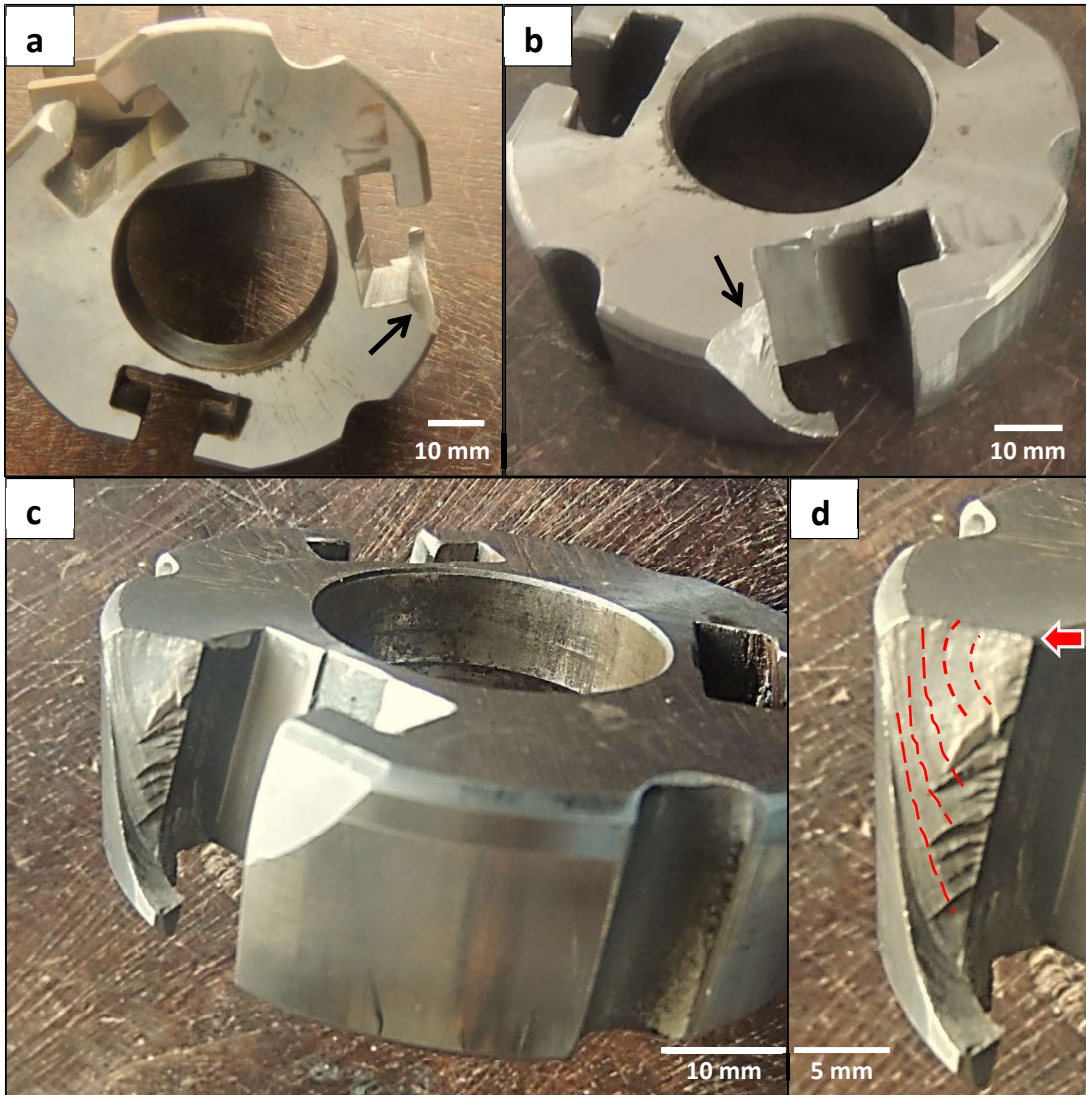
Different views of the failed plunger showing the fracture-location and surface features; (a, b) oblique views showing that the plunger fractured at one corner of a T-slot, (c, d) close-up views of the fracture surface showing fatigue beach-marks suggesting that the fracture initiated from the top corner of the T-slot as illustrated by the arrow and the dotted-lines.
